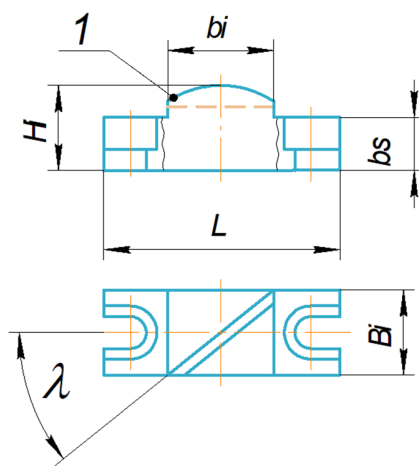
Design of a peackless cutting edge of a modular cutter-type reamer with rigid fixation: 1 – cutting edge of the inserted cutter;  $b_i$  – shoulder height;  $B_i$  – width of the inserted cutter;  $H_i$  – height of the inserted cutter;  $L$  – length of the inserted cutter;  $\lambda$  – inclination angle of the main cutting edge.
